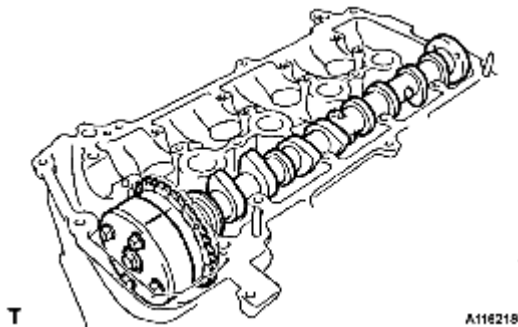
Identifying Camshaft And Camshaft Timing Gear Assembly
